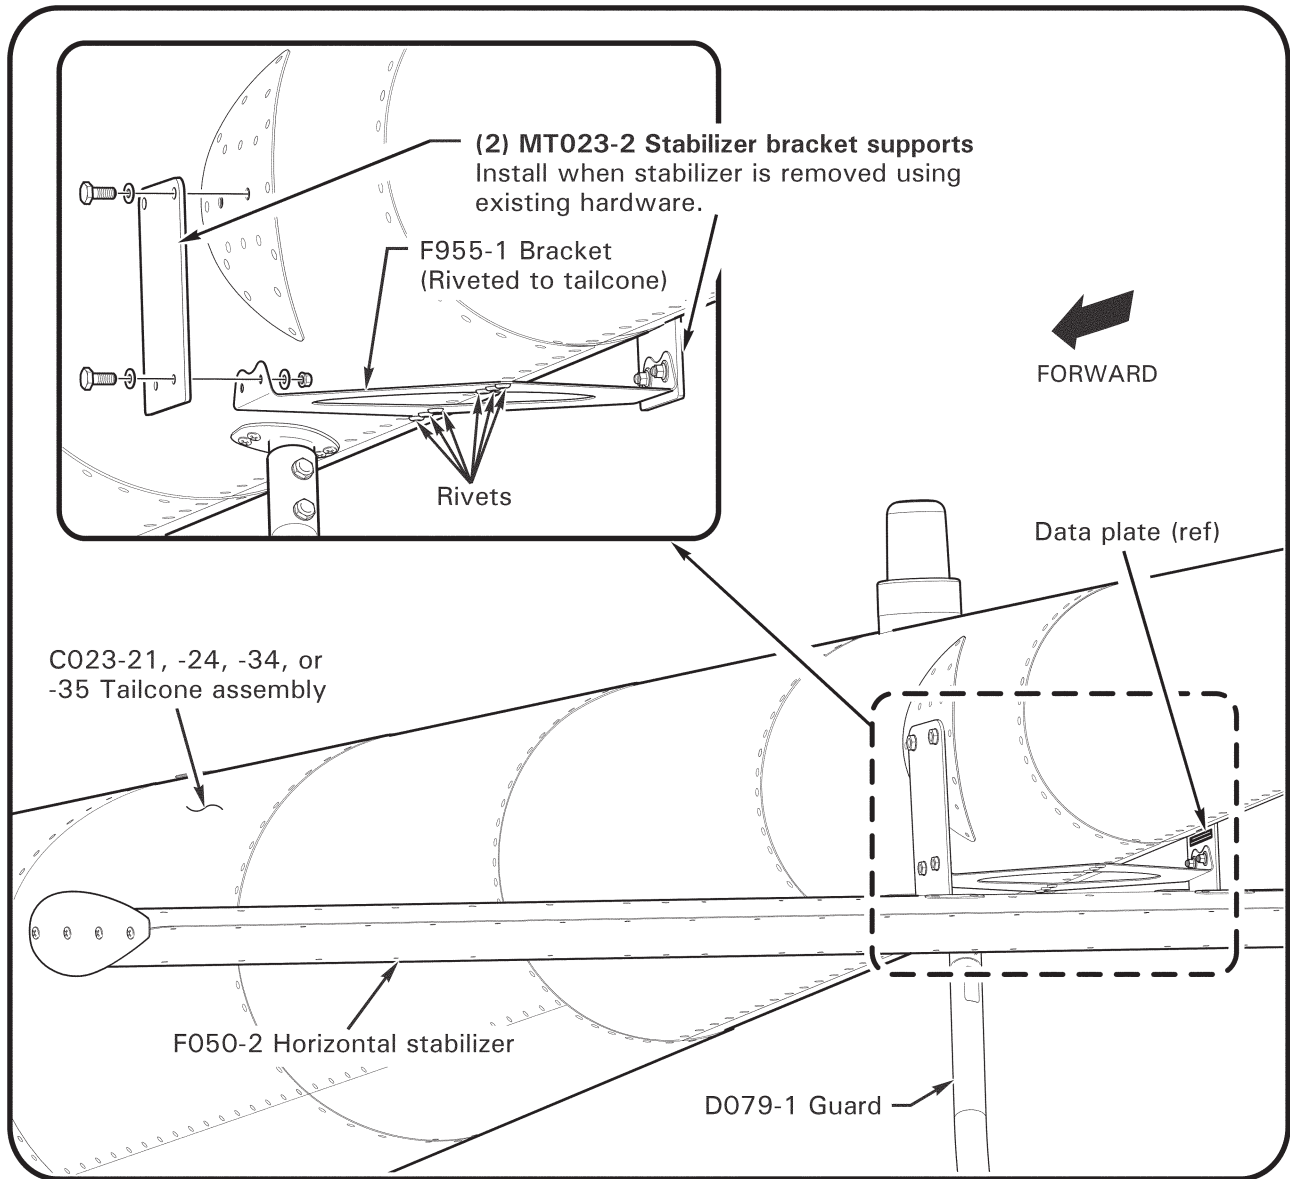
F050-2 HORIZONTAL STABILIZER ASSEMBLY
